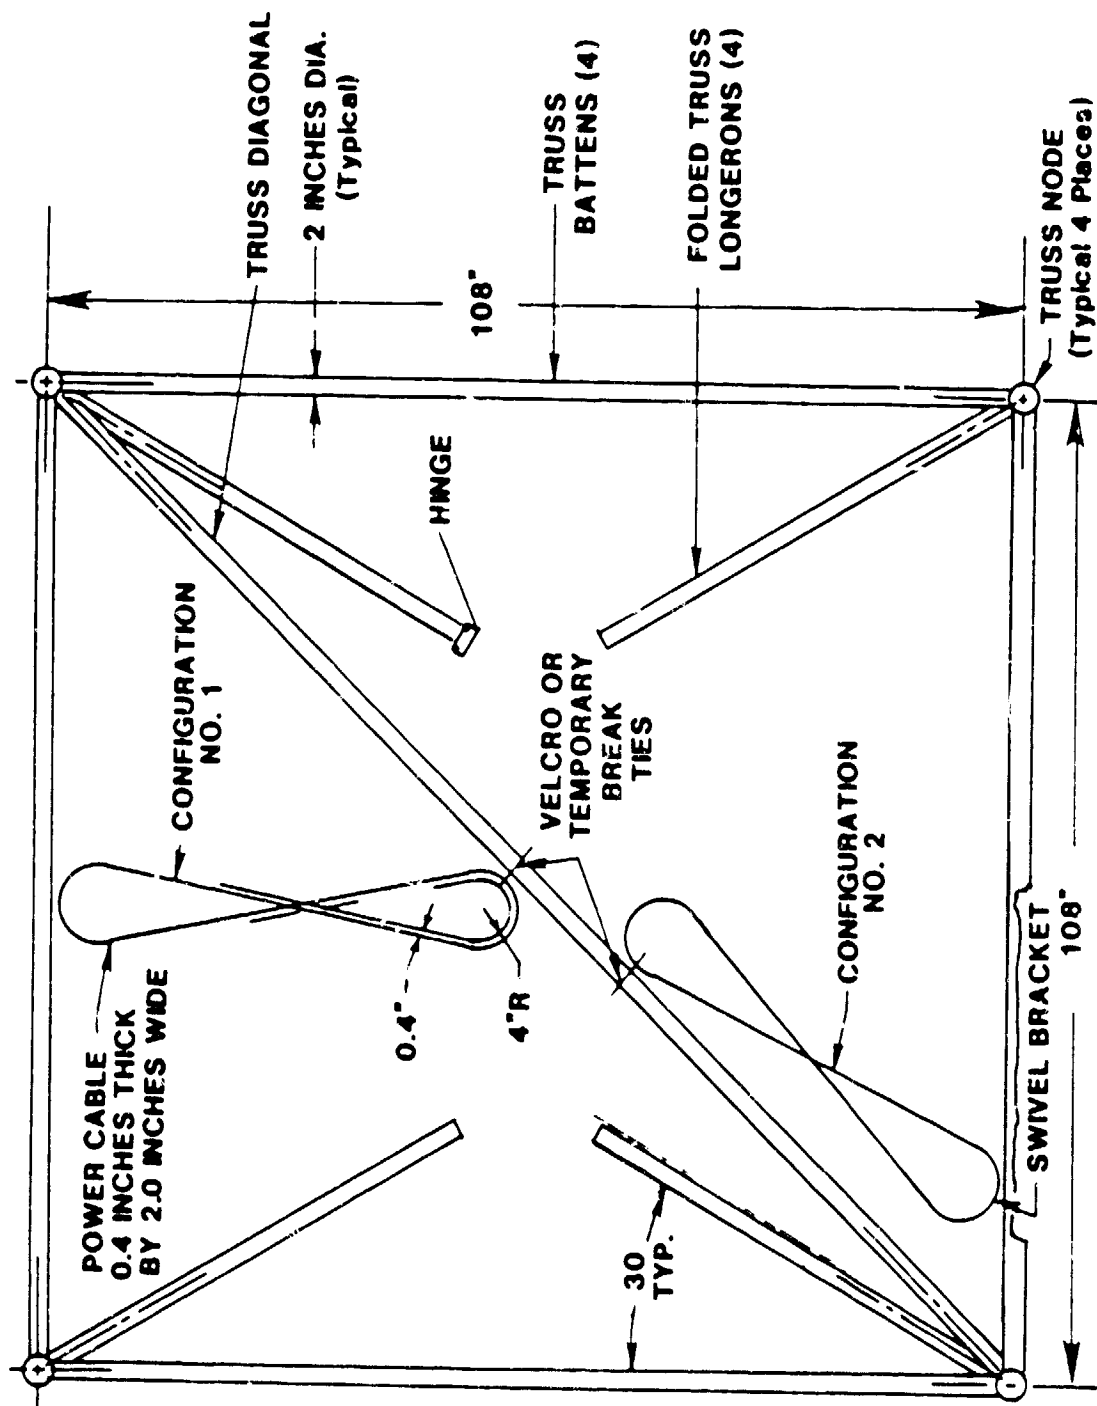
Power Cable Installed in the Folded 9 Foot Truss
